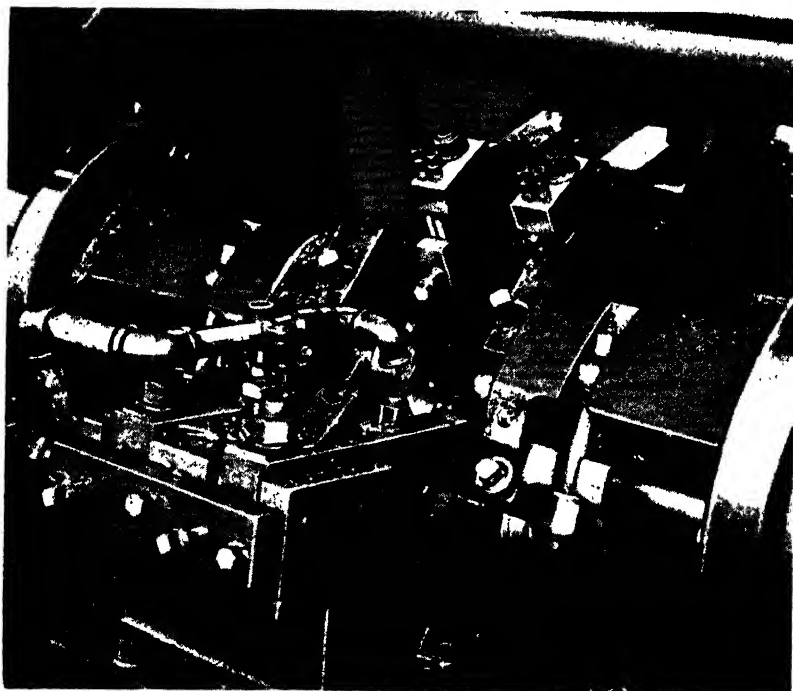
Crankshaft Lathe Machining the Pin Bearings of Crankshafts for Automobile Engines
